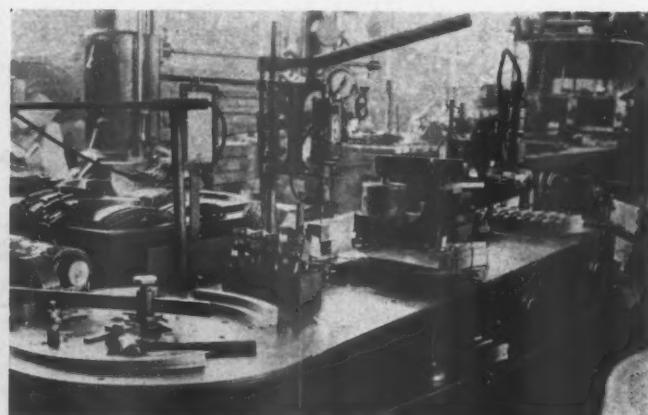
A general view of the bench where the rings are prepared for assembly—From left to right: The segment saw, sensitive drill, riveting press, riveting hammer and grinder
